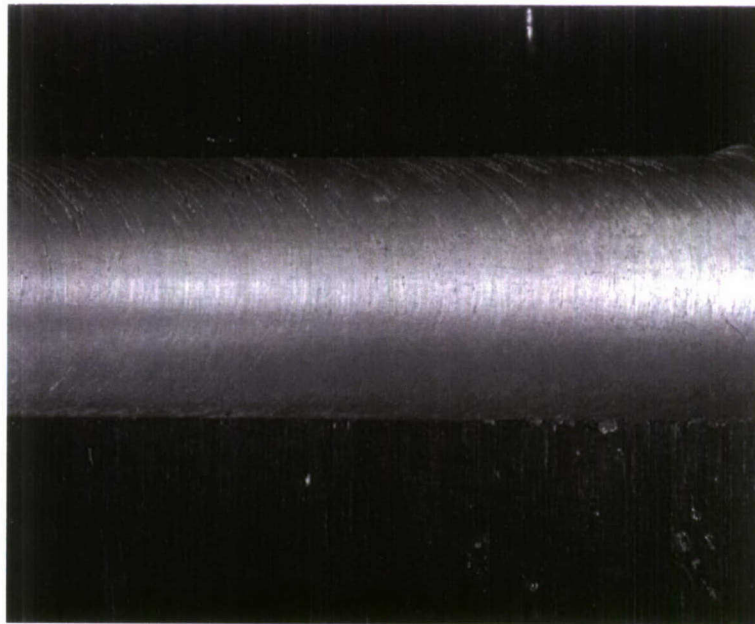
Close view of EAFSW weld of Figure 8. Mag. ~4X
